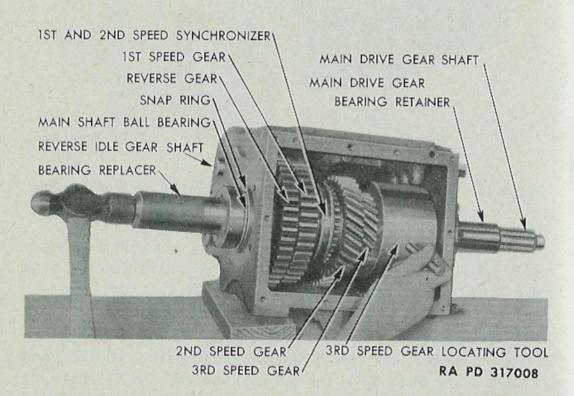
Driving Front Bearing into Case with Bearing Replacer 41-R-2397-72 and Third Speed Gear Locating Tool 41-T-3261-450
